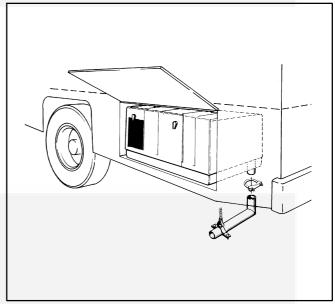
TYPICAL TAILPIPE INSTALLATION
